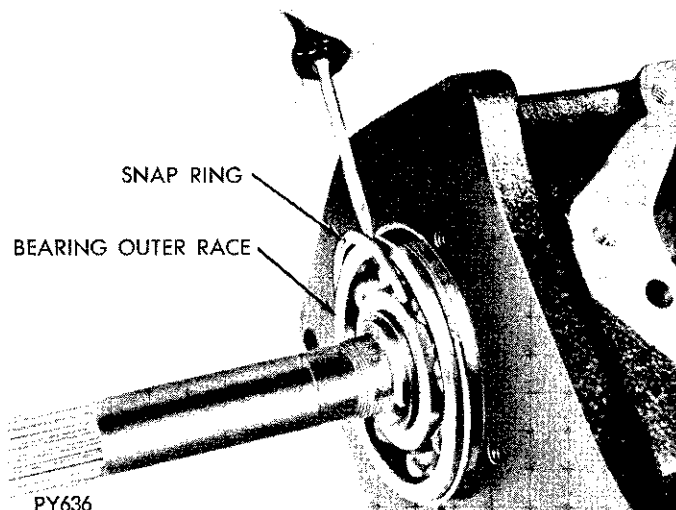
Snap Ring on Pinion Gear Bearing—Removal
